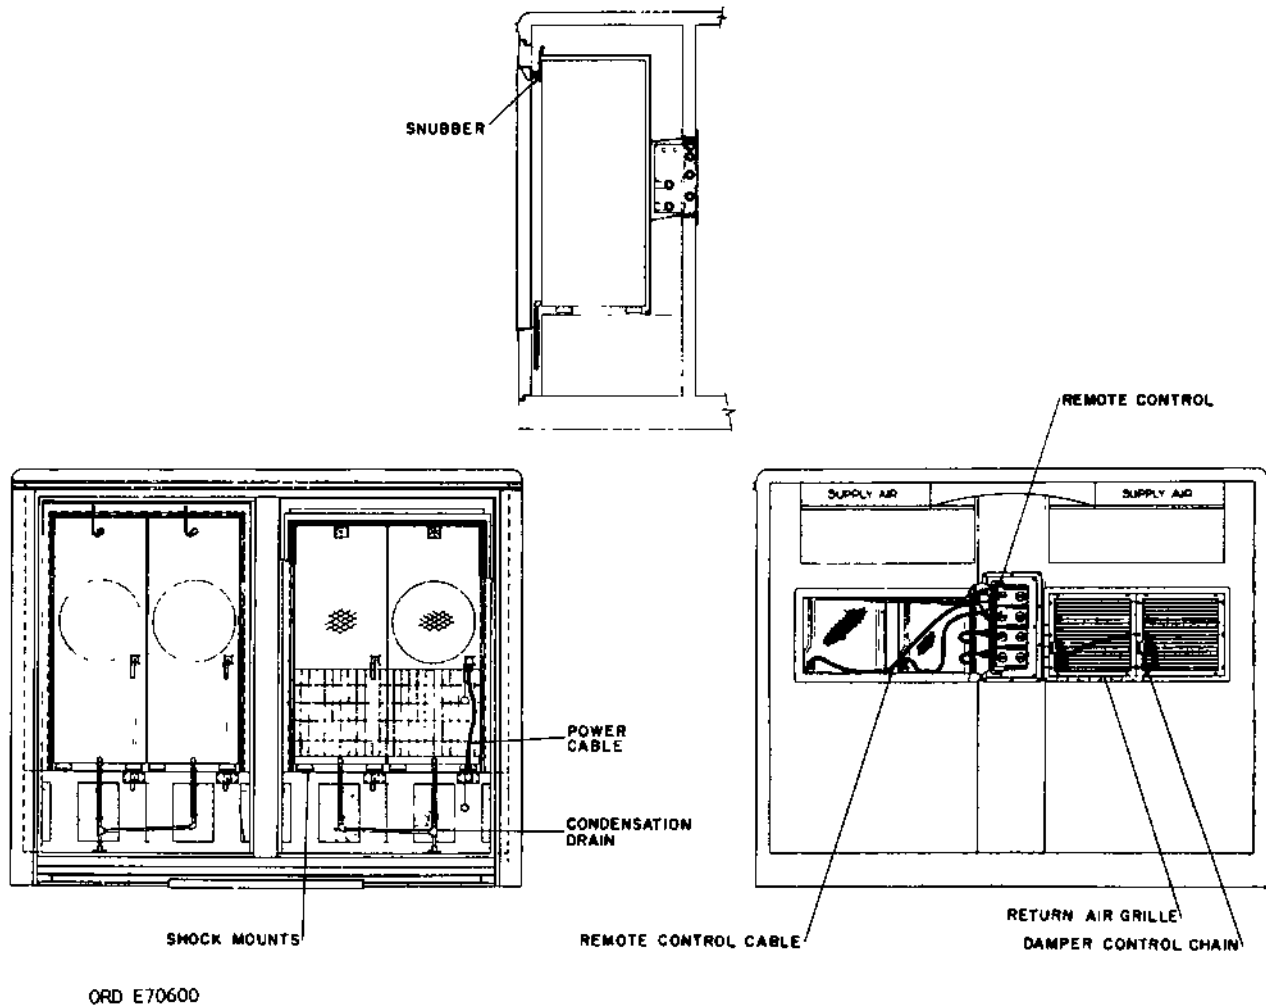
Air conditioner and remote control unit, XM680, XM680E1
